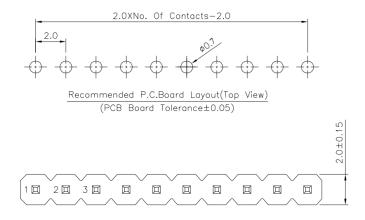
SM5210-MINI Mechanical Drawing (MINI20 Package)
